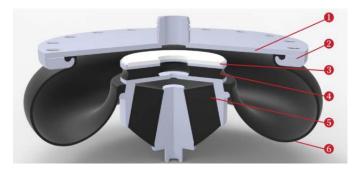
Diaphragm-type pneumatic spring: 1 – top plate; 2 – clamping ring; 3 – sliding plate; 4 – emergency spring; 5 – auxiliary spring; 6 – air bellow
